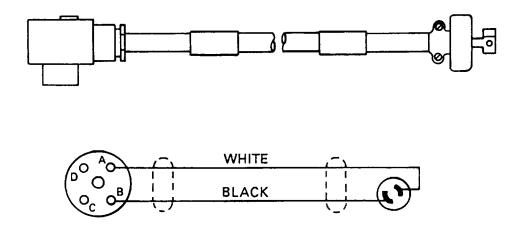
Cable Assembly CX-4881/U, drawing number SM-D-345266.
